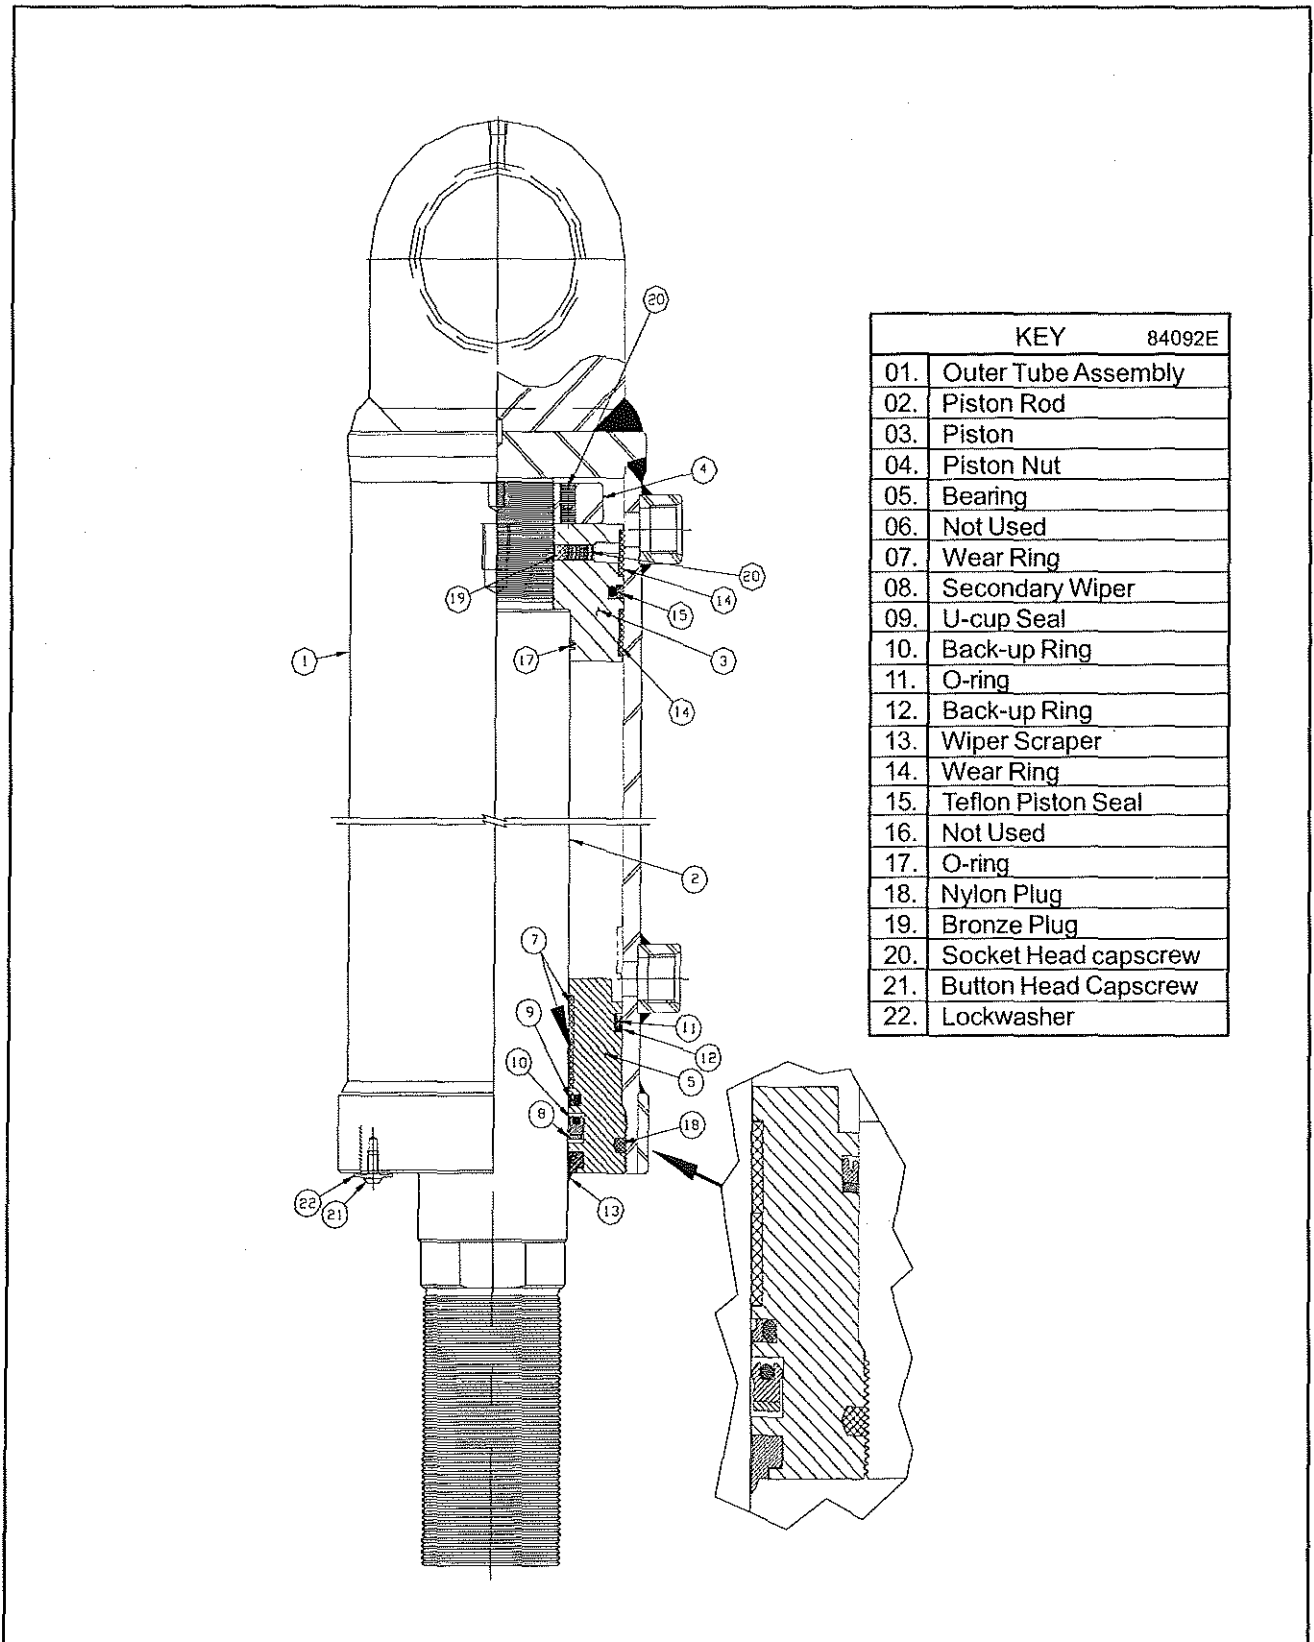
D - STEERING CYLINDER ASSEMBLY (PART NUMBER 84092K)
